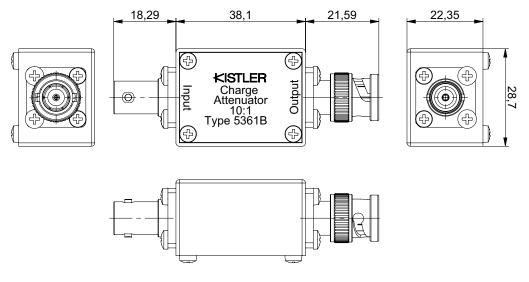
Dimensions Charge Attenuator Type 5361B...
